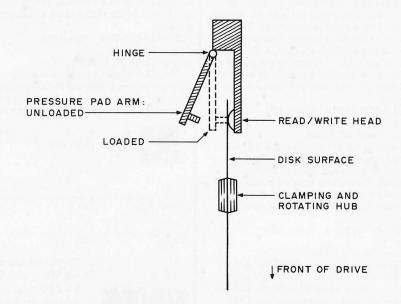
Diagram showing a side view of the floppy disk loaded in the drive. When loaded, the read/write head is pressed against the surface of the disk by the pressure pad.
